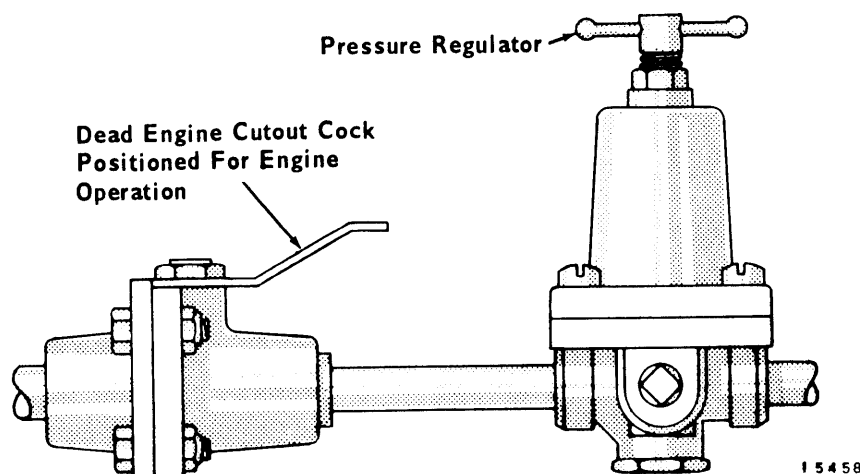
Dead Engine Cutout Cock And Pressure Regulator
